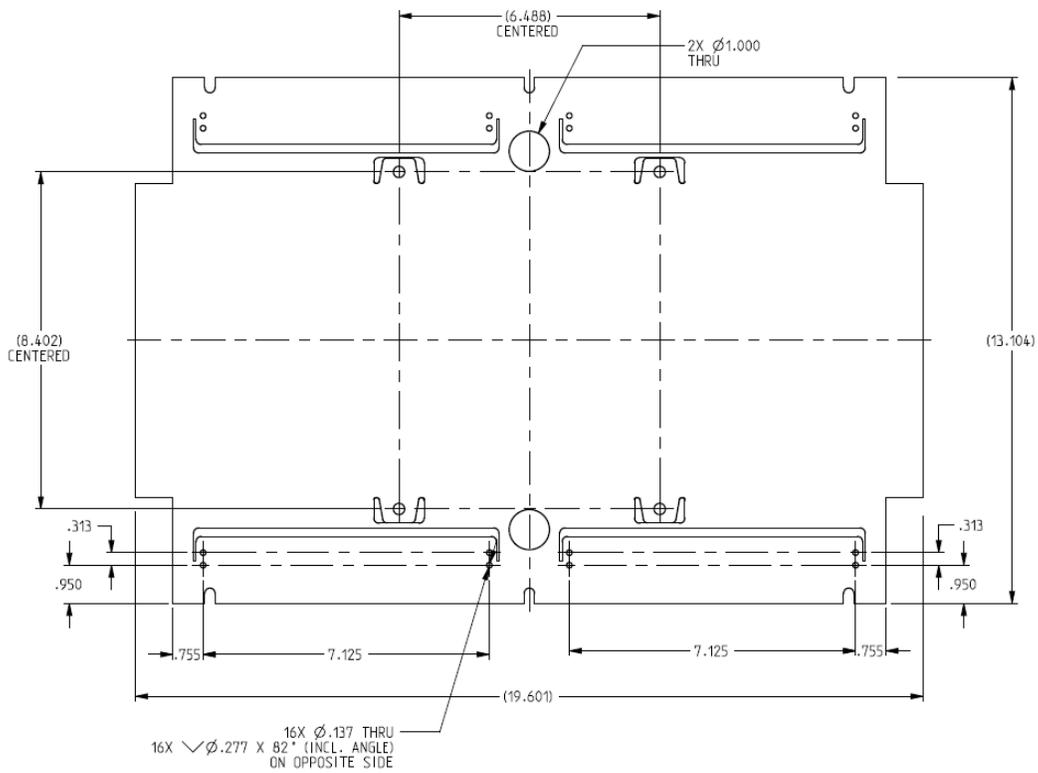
Sheet Metal Layout with Terminal Blocks
